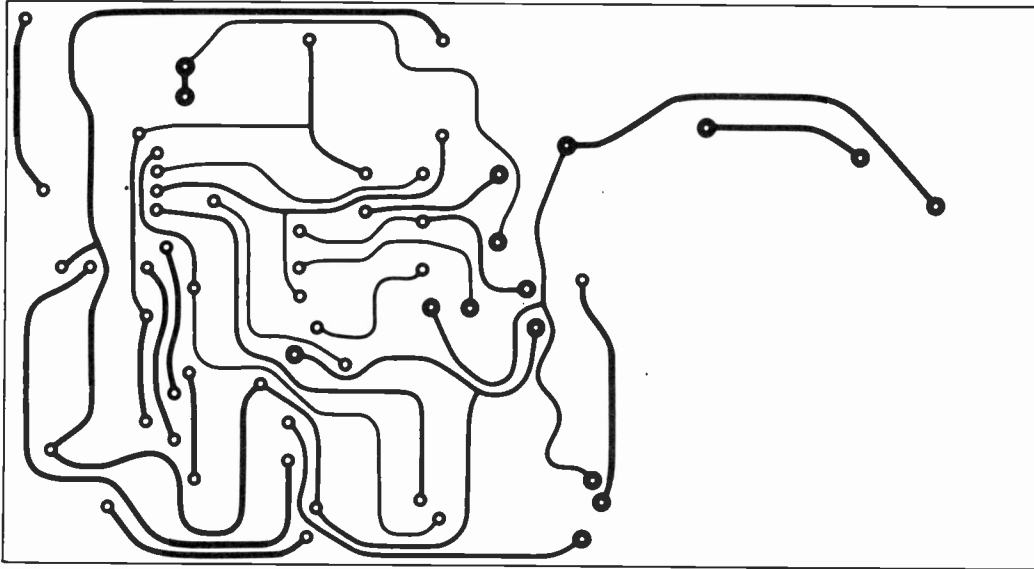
(a): Main printed board, topside track pattern, shown full size.
